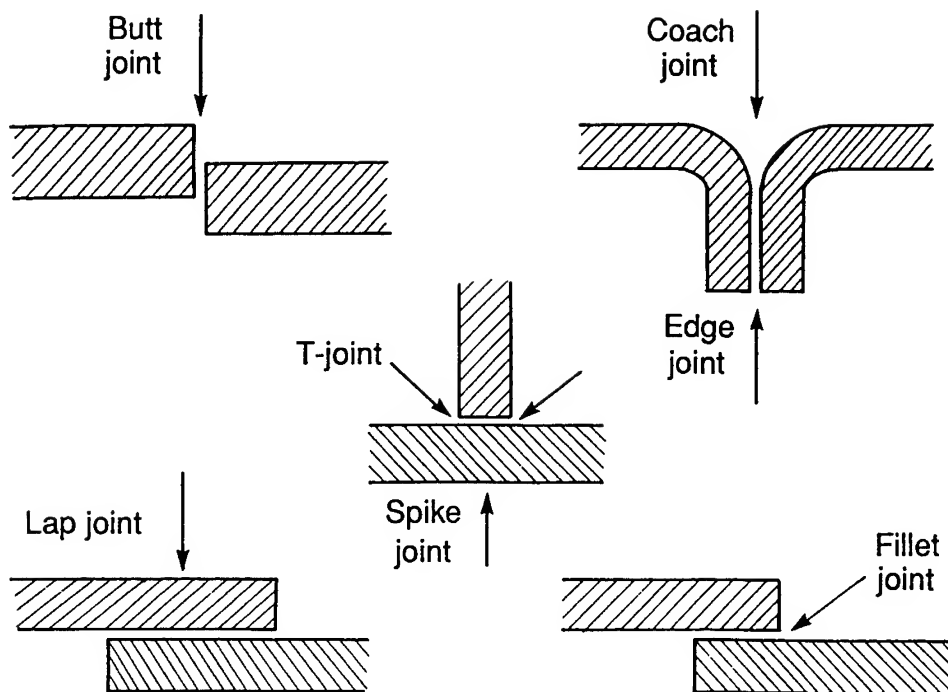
Miscellaneous joint configurations amenable to laser welding.
